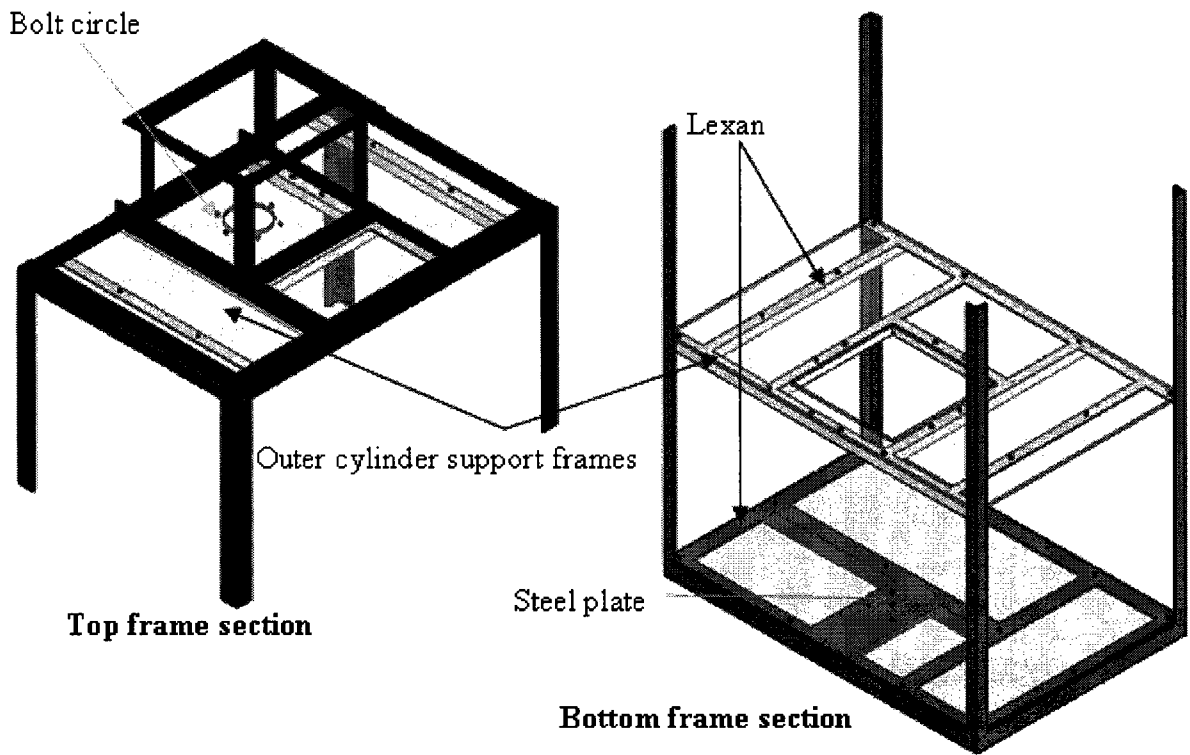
Isometric views of top and bottom sections of the frame showing the two support sub-frames for the outer cylinder
